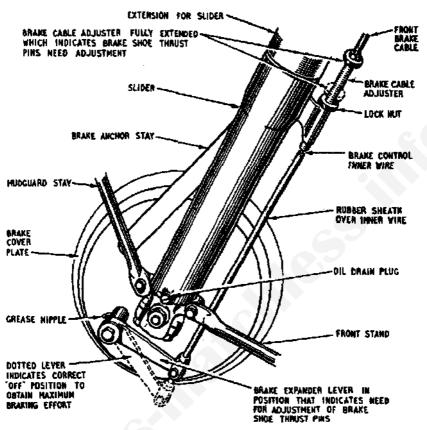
SHOWING FRONT BRAKE CABLE ADJUSTED THREAD EX-HAUSTED, INDICATING BRAKE-SHOE THRUST-PIN ADJUSTMENT IS NECESSARY.
